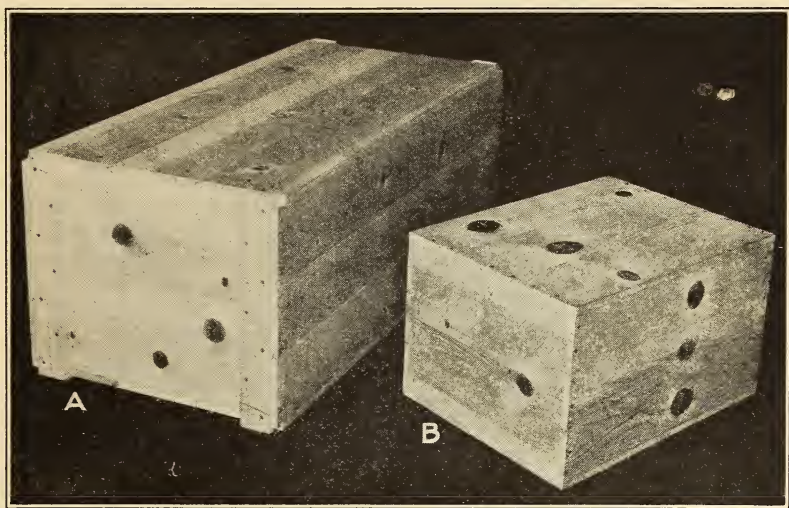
Tongued-and-grooved joints between the individual pieces making up the box faces: A, An A box having inside dimensions of $33\frac{1}{2}$ by $16\frac{3}{4}$ by $13\frac{3}{4}$ inches; B, a B box having inside dimensions of $17\frac{1}{4}$ by 13 by $9\frac{7}{8}$ inches
